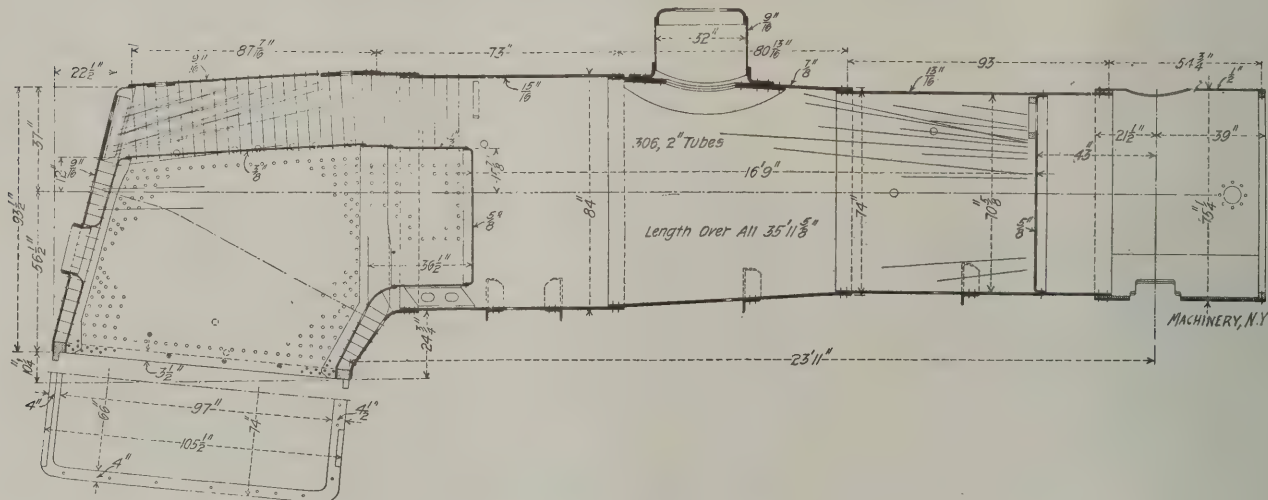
Boiler of Cole Four-cylinder Balanced Compound Locomotive, with Combustion Chamber.
